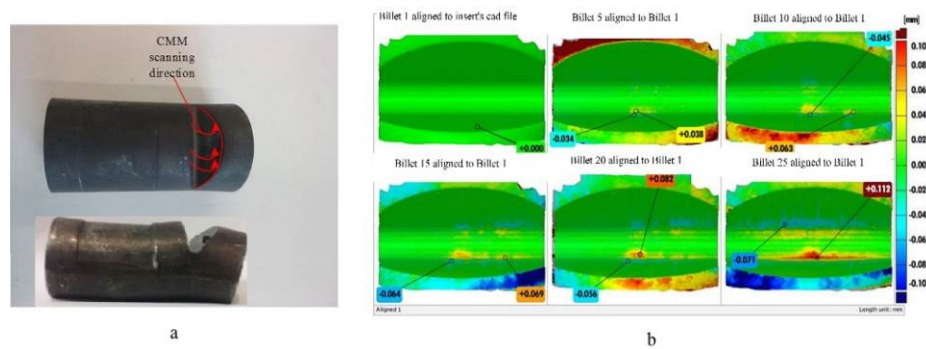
a) CMM Scanning direction on the billet after a forging trial (1050°C billet temperature and 8KJ energy on Screw press); b) CMM analysis aligning carried out for billets 5, 10, 15, 20, 25 which were aligned to the billet 1.
